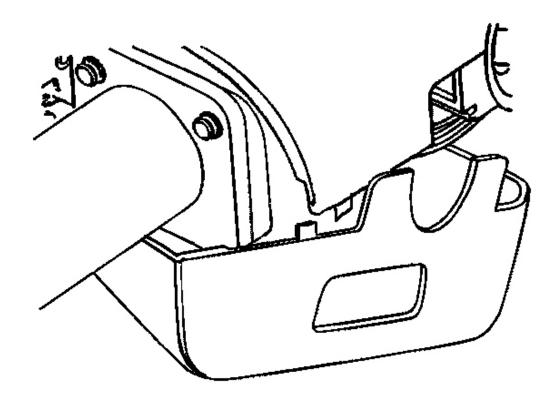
View Of Lower Trim Cover At Upper Trim Cover Courtesy of GENERAL MOTORS CORP.
